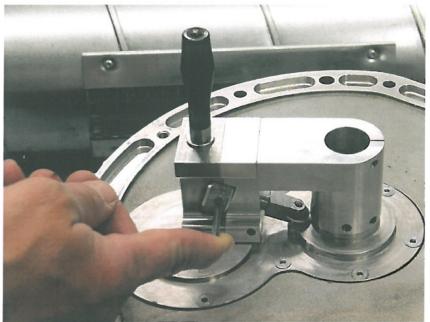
Turn the adjustment wheel to feed the cutting tool
